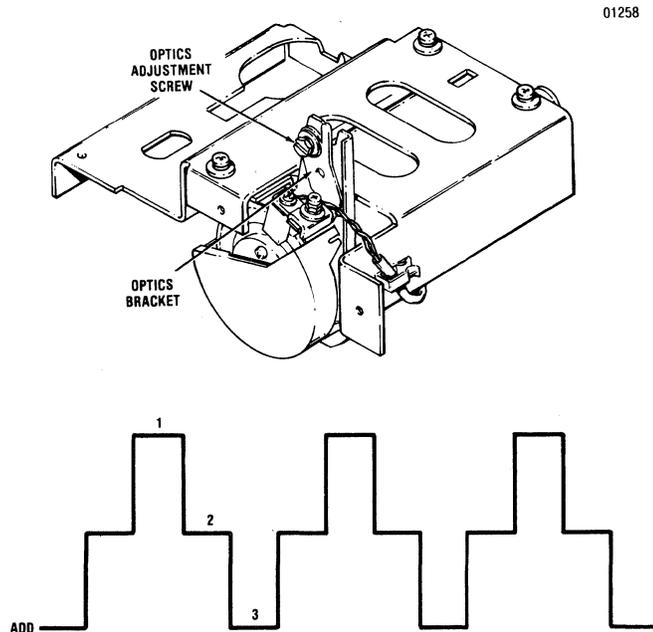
ELECTRICAL ADJUSTMENT, OPTIC SENSOR AND ENCODER/TIMING DISC
